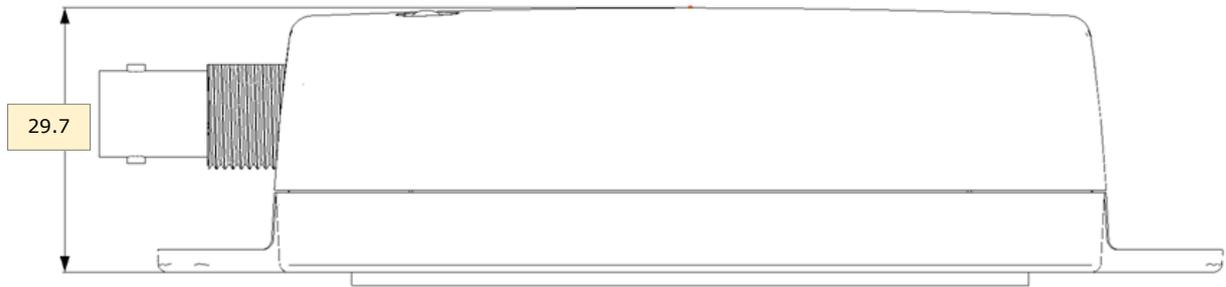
LDSBus Dissolved Oxygen Sensor Adapter Dimension – Side View
